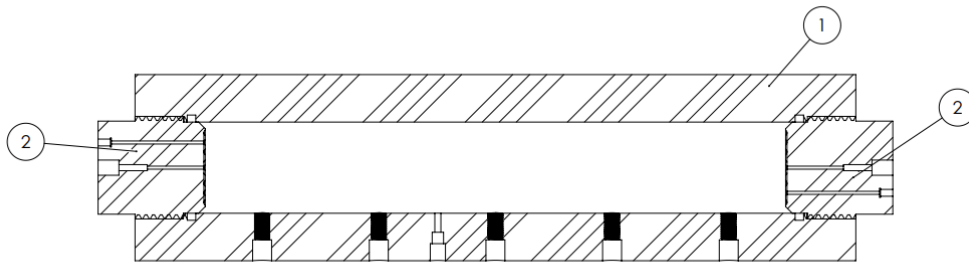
General core holder drawing showing the full PEEK housing (1) with threaded caps and sensor access points. The core chamber is 400 mm long, seated between dual-threaded caps (2).
